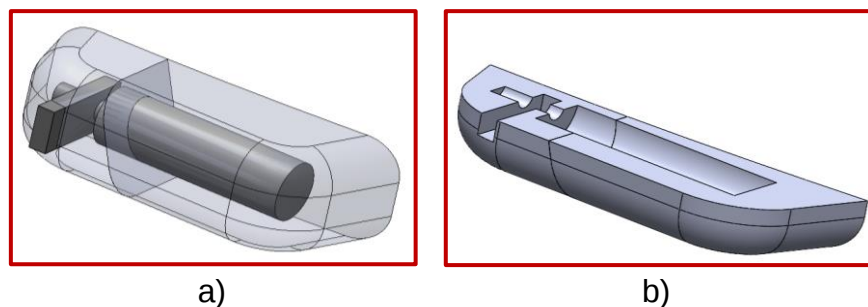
Double Figure of the Cylindrical Guides mechanism: a) Component with the filling object; b) Component after the subtraction of the filling object.
